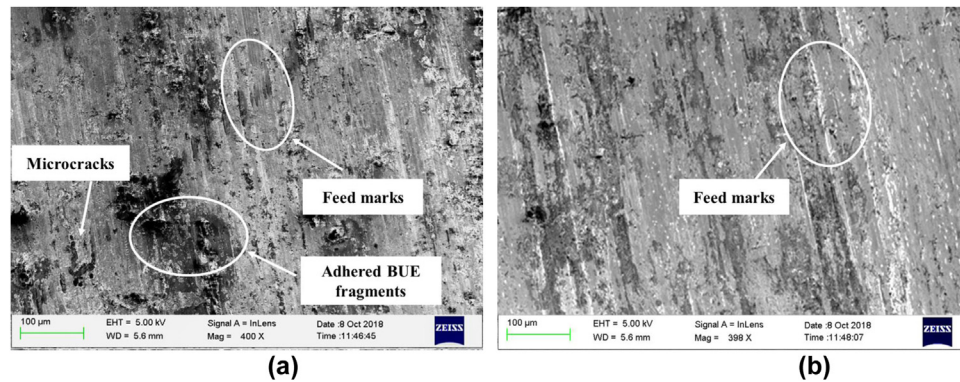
Morphology of tooth flank surface of MQLAH manufactured (a) the worst quality spur gear obtained using hob cutter speed of 8 m/min and lube flow rate of 80 ml/h, and (b) the best quality spur gear obtained using hob cutter speed of 22 m/min and lube flow rate of 100 ml/h (Constant parameters: axial feed = 0.44 mm/rev; depth of cut = 1.125 mm; nozzle angle = 30°; and air pressure = 4 bar).
